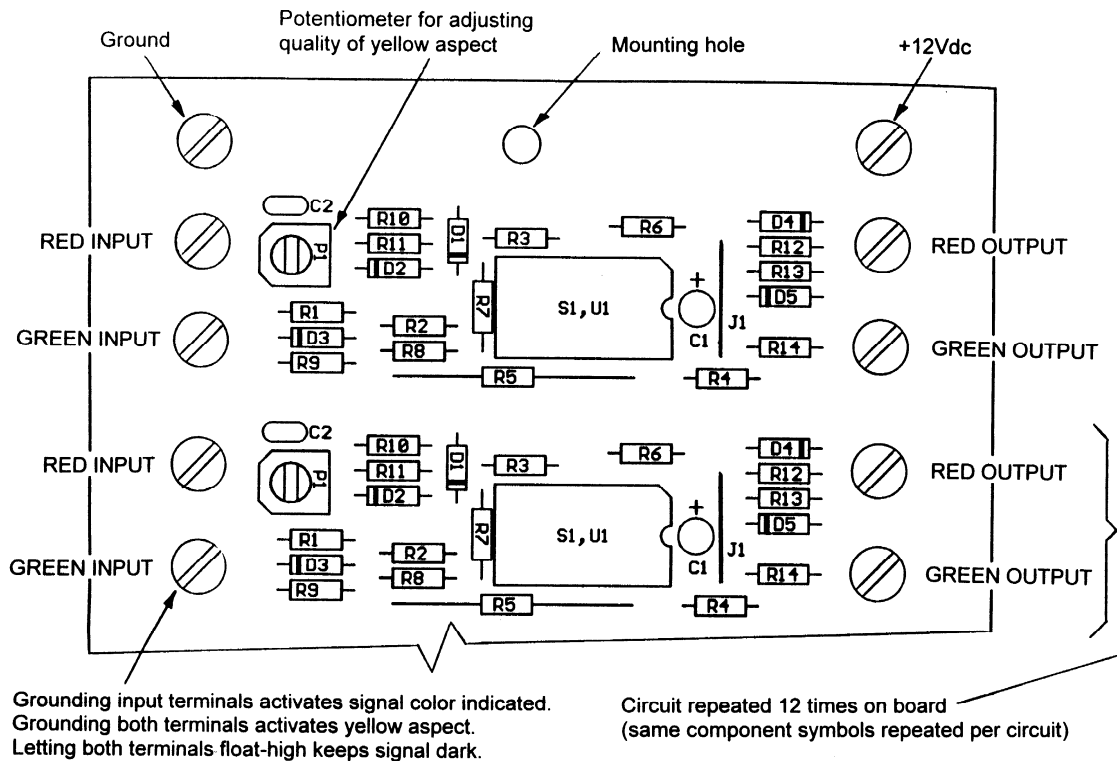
Parts layout for Searchlight Signal Driver (SSD) card
